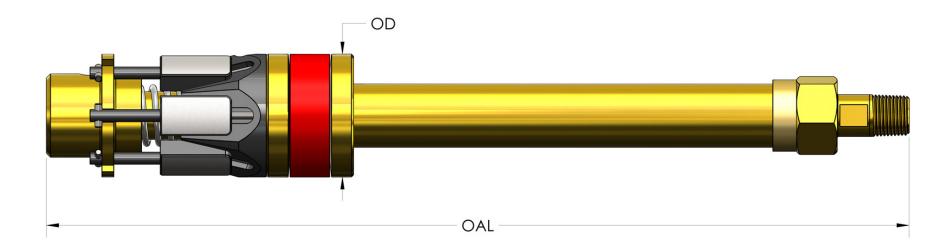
GripSafe ST Inboard Insertion Blocking (IIB) Plug Diagram Dimensions
